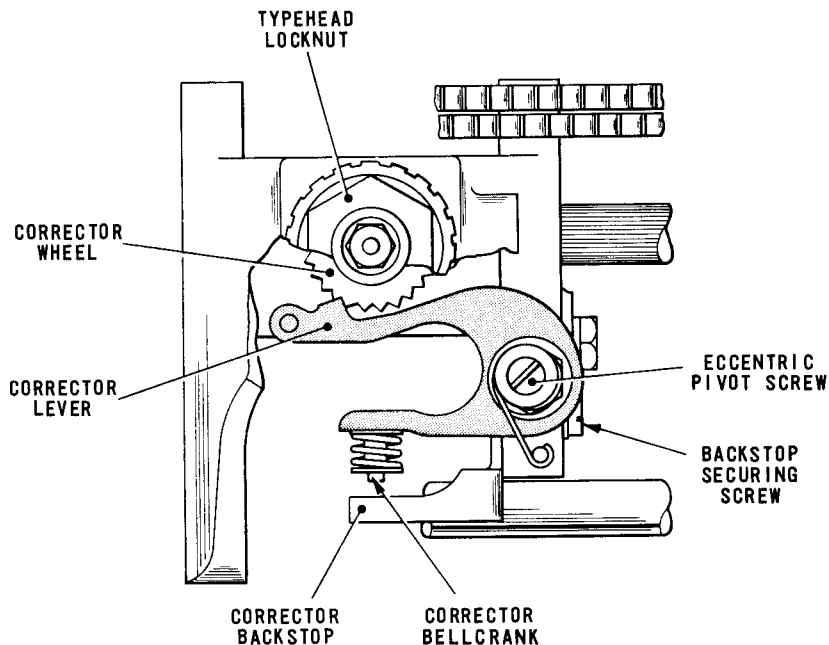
TYPEHEAD CORRECTOR MECHANISM
